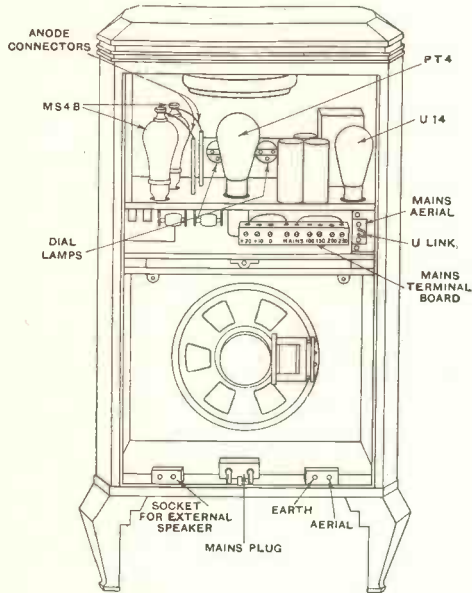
REAR VIEW OF THE SET WITH THE BACK REMOVED.
